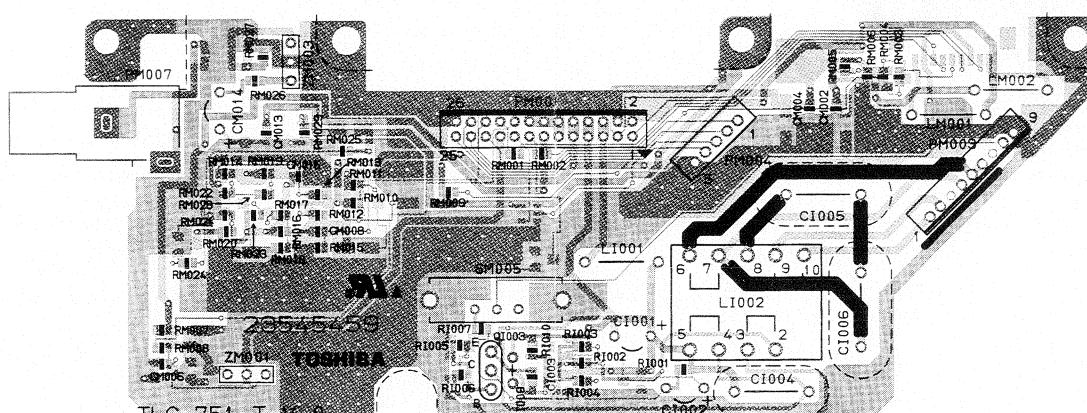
U0041 Inverter PC Board (Bottom Side)
